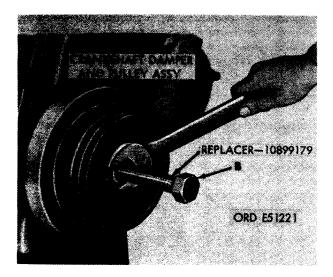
INSTALLING CRANKSHAFT DAMPER AND PULLEY ASSEMBLY USING REPLACER - 10899179.
